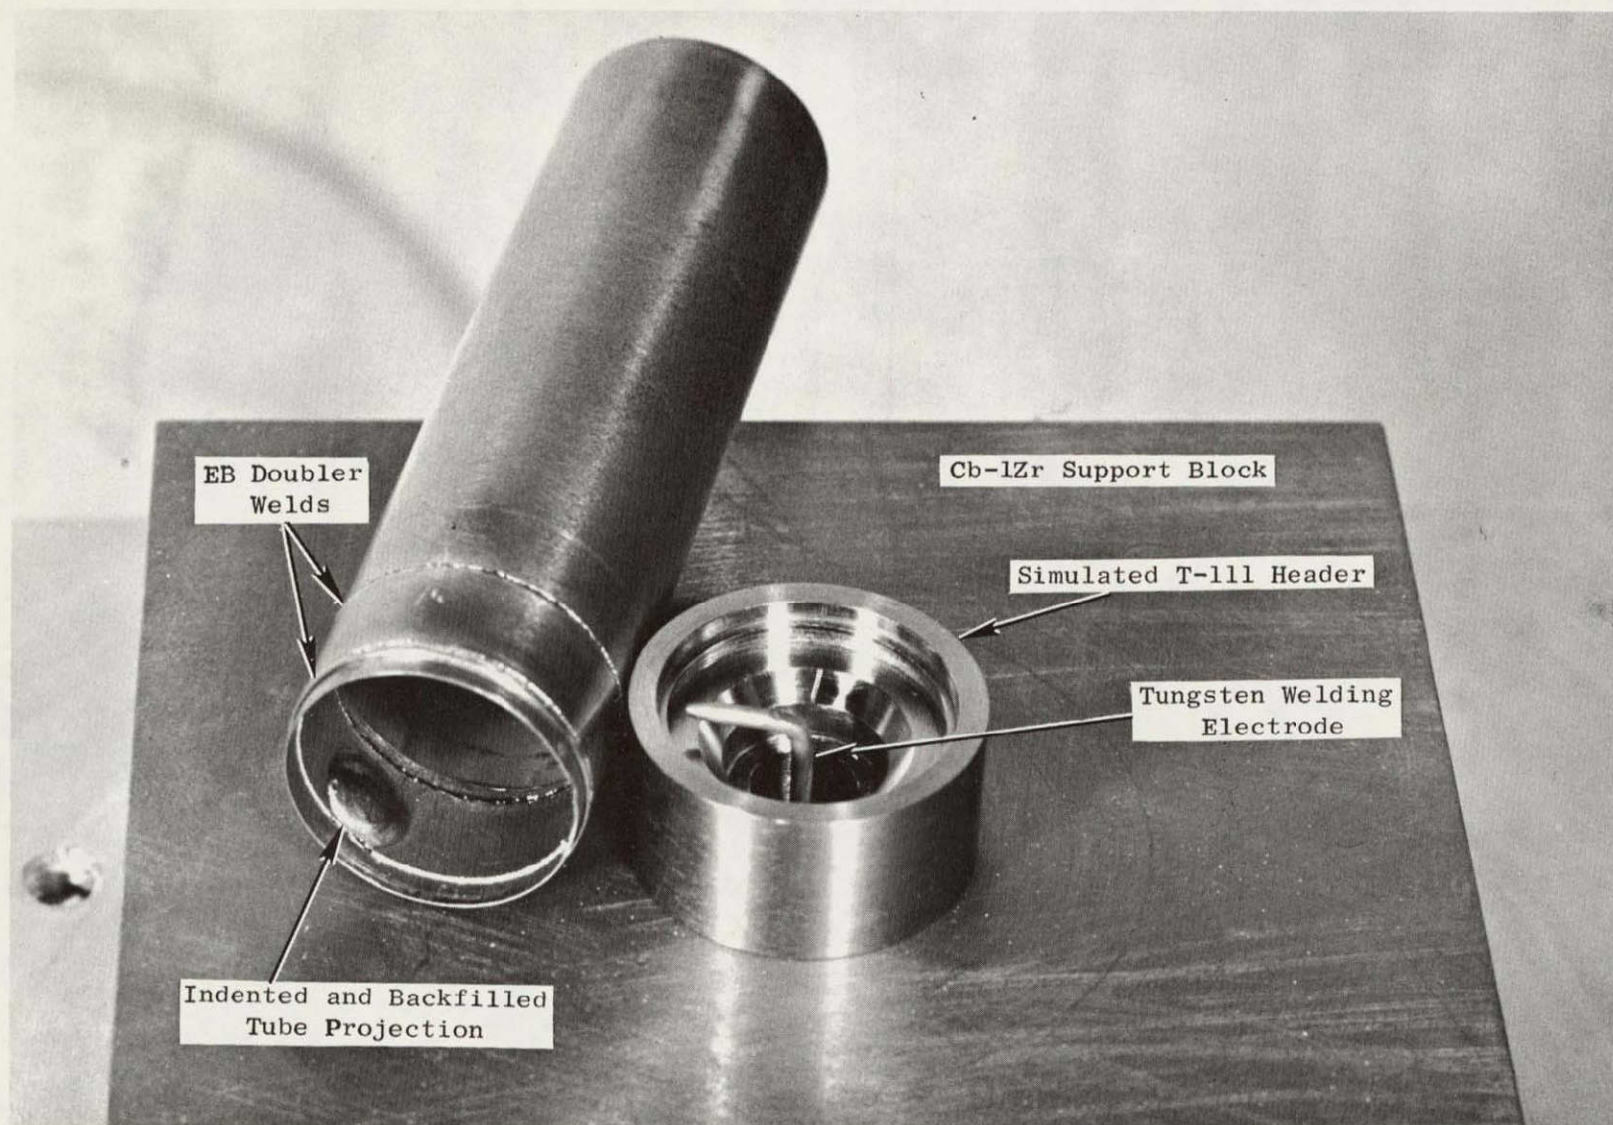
T-111 Tube with EB Attached Extended Doubler and T-111 Simulated Header Positioned Atop Cb-1Zr Support Block Prior to GTA Welding. (70-6-13B)
